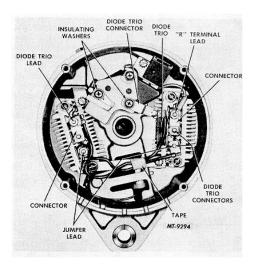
End Frame View with Stator Removed (Two Rectifier Bridge Type)
